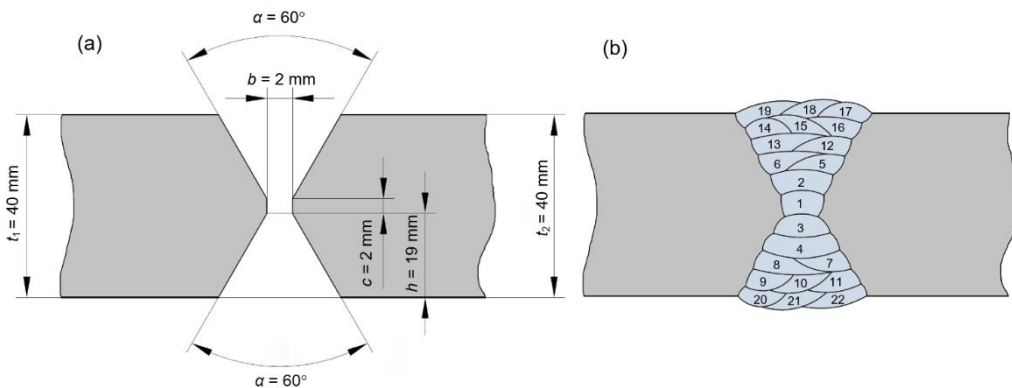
X welded joint: (a) joint groove geometry and preparation, and (b) welding passes
